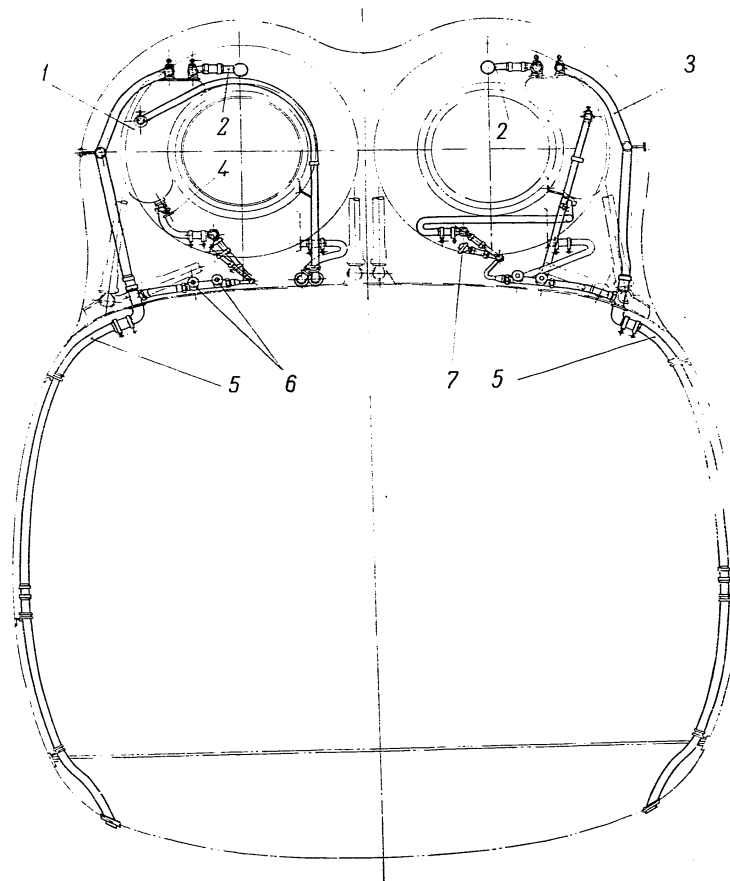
ENGINE LUBRICATING OIL SYSTEM
